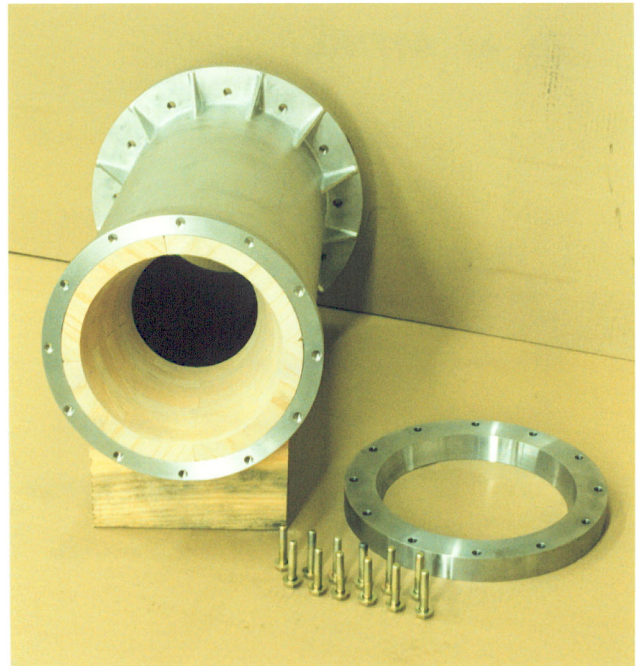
The completed thrust chamber assembly including the housing, throat, chamber liner, exit nozzle, and nozzle retaining ring.
